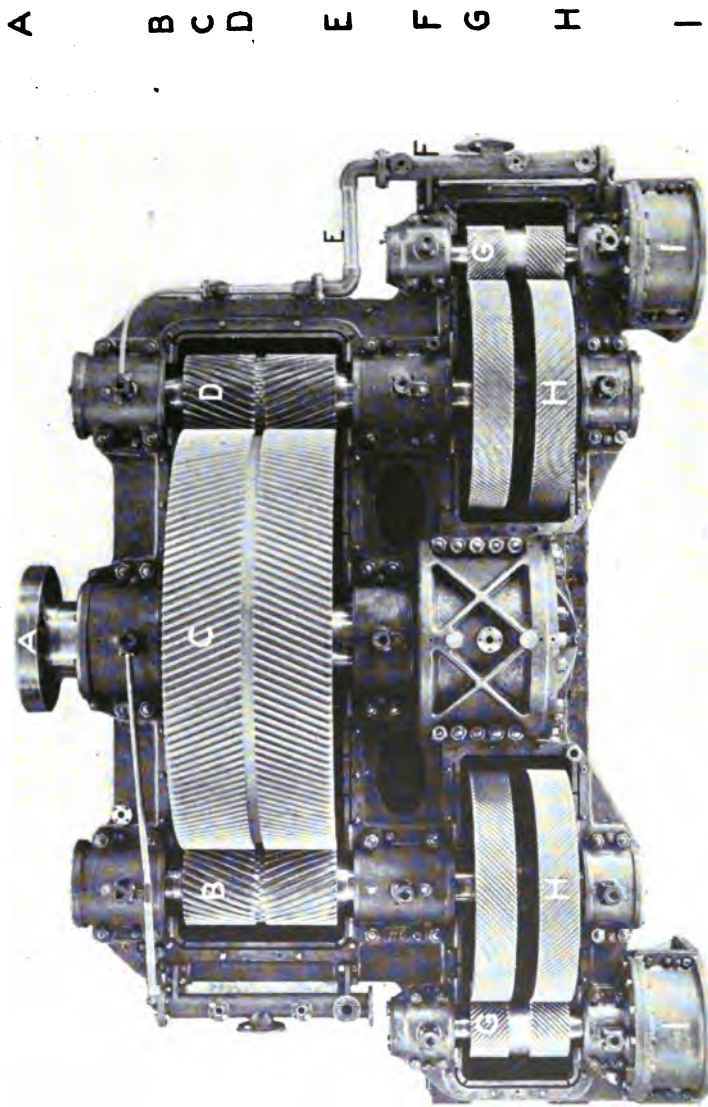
PLATE XLV.—A gear that reduces a turbine speed of 3600 R. P. M. to a propeller speed of 90 R. P. M. A, coupling to line shaft, *i.e.* propeller shaft; B, intermediate drive pinion; C, main gear; D, intermediate drive pinion; E, oil line; F, oil manifold; G, turbine shaft pinions; H, intermediate gears; I, connections to turbines.
